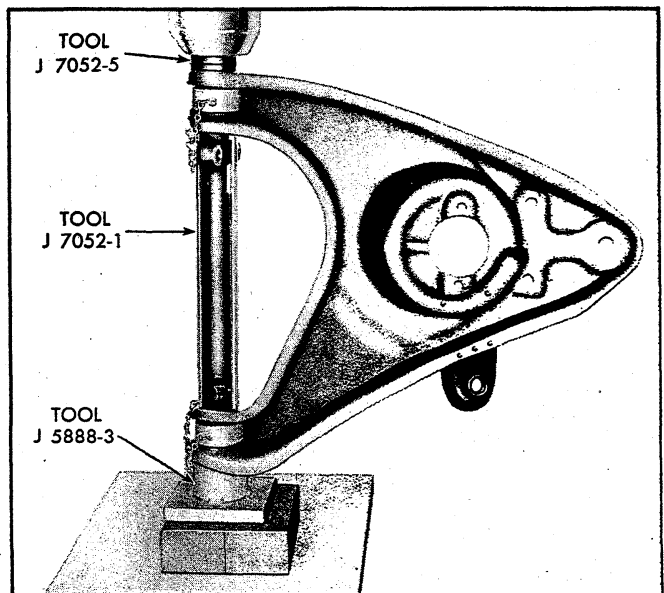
Installing Lower Control Arm Cross Shaft Bushings
